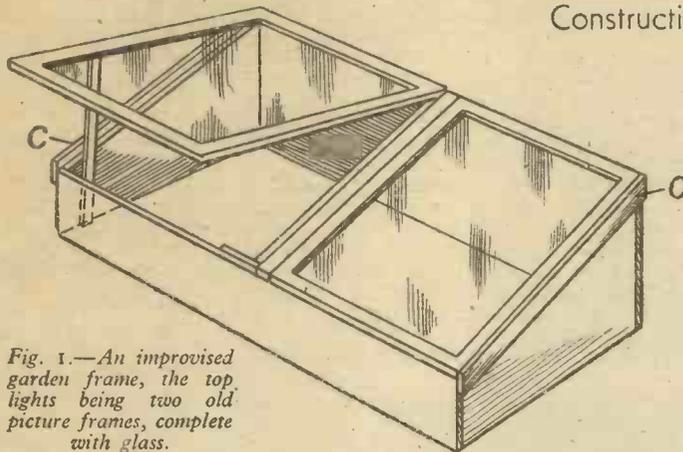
An improvised garden frame, the top lights being two old picture frames, complete with glass.
